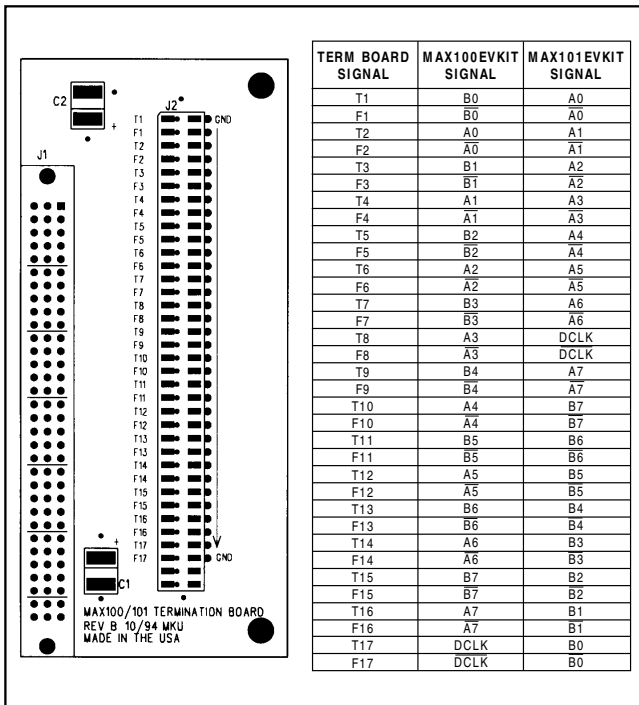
Termination Board Component Placement Guide and Signal Connections—Component Side
